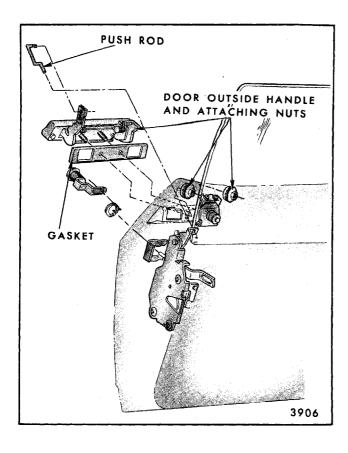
Outside Handle Removal (Lift Bar Type)
